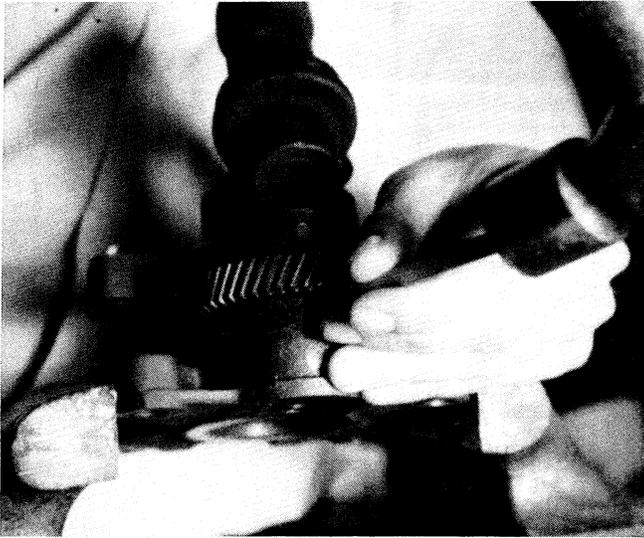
Peening Crankshaft Gear Hub to Hold Pin
